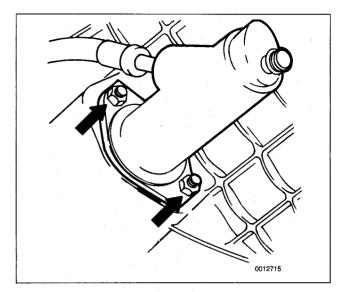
Clutch slave cylinder mounting bolts (arrows).
